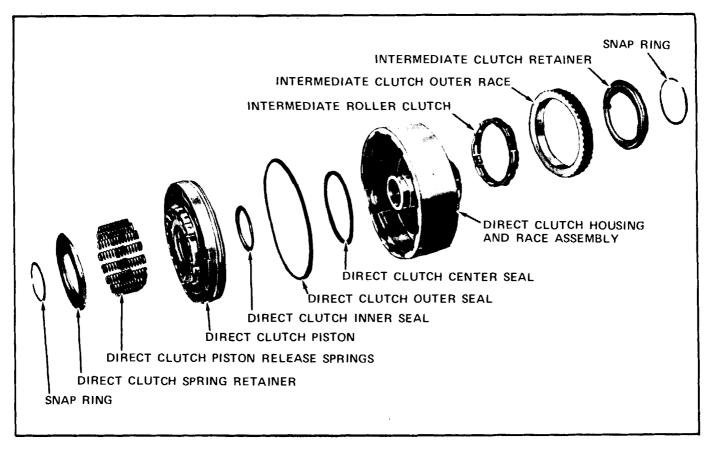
E-129 Exploded View of Direct Clutch Piston and Intermediate Roller Assembly
